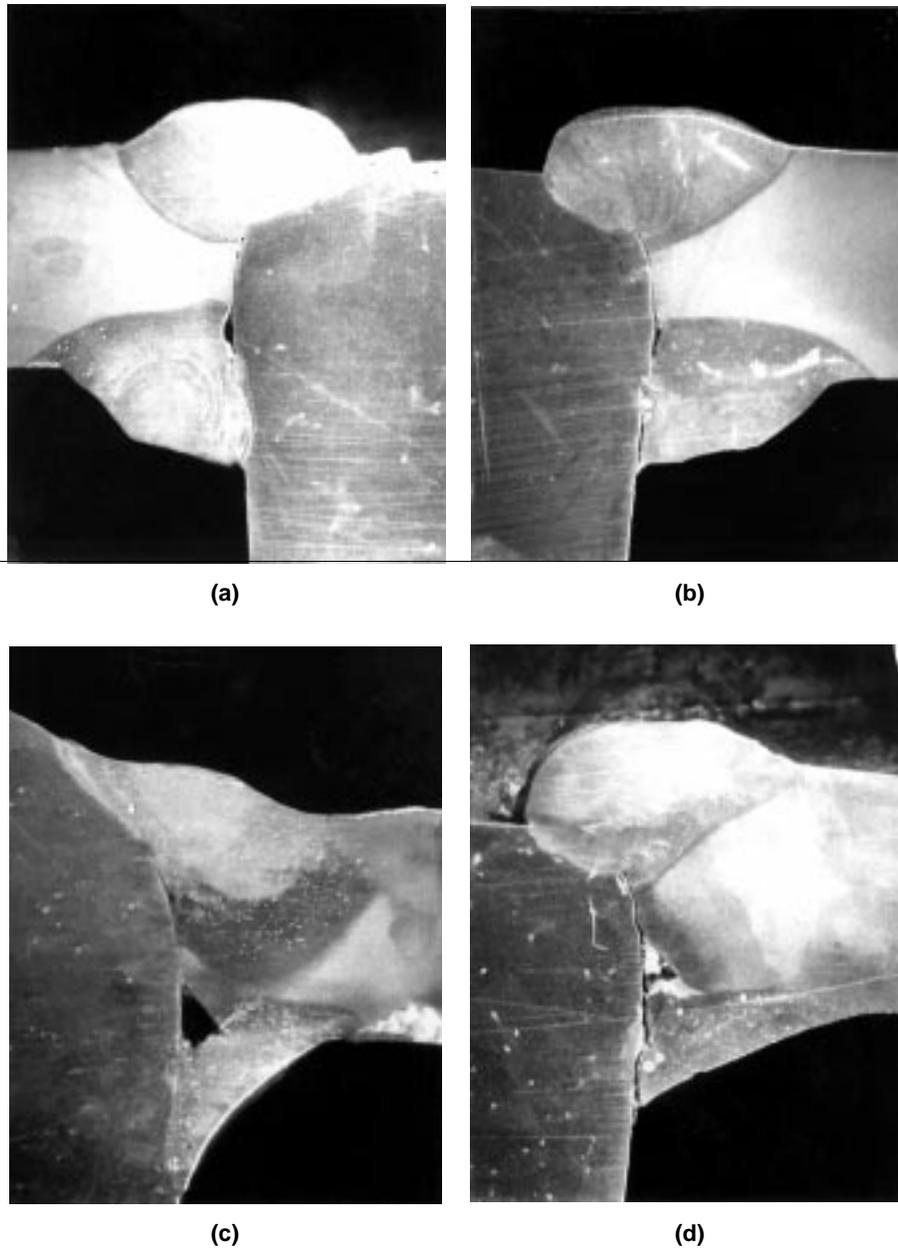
Cross-section of welds on H1347-associated stacking fixture.
